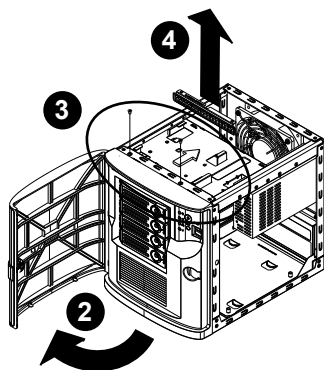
Configuring the Chassis for the DVD-ROM Drive
